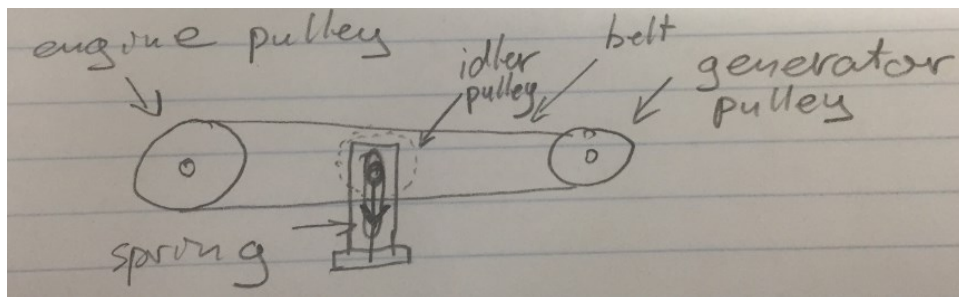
Belt tensioner exploded view (Automatic Belt Tensioner.)
